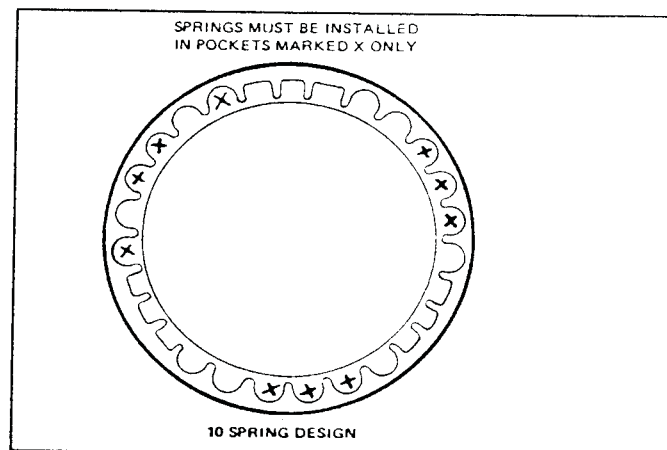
Reverse-High Clutch Piston Return Spring Locations
